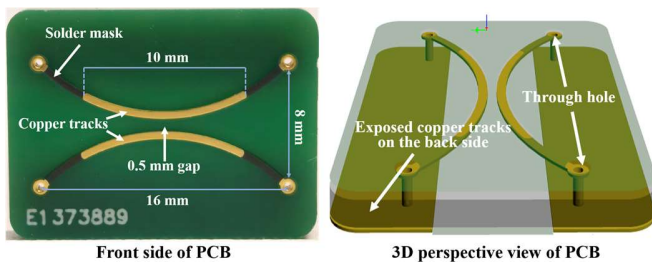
Front side of PCB design (real PCB sample) and 3D perspective view of the whole PCB.
